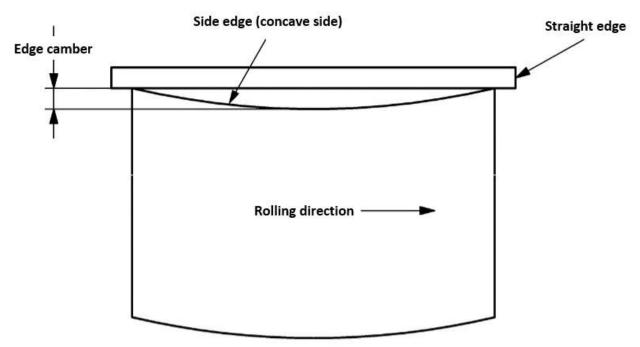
Schematic drawing of steel plates and sheets edge camber measurement
